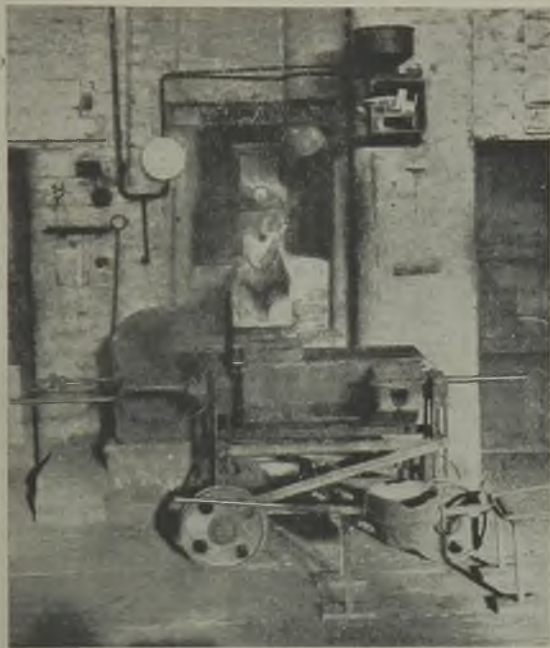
SHOWING VIBRATORY FEEDER, CONTROL VALVE, MIXING LADLE, SHANK AND BLAST-CONTROL HANDLE.
